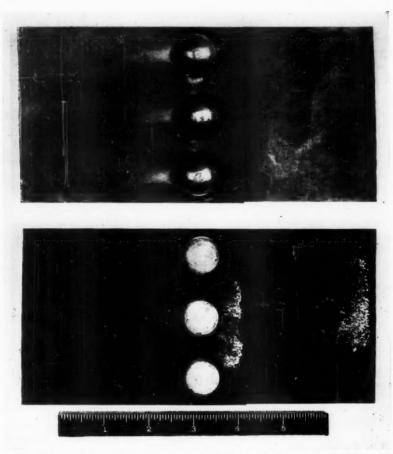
Top and Bottom Surfaces of a Riveted ZK60A Magnesium Specimen, 0.25 in. Thick, After Being Exposed to Industrial Atmospheric Conditions for a Six-Month Period.
